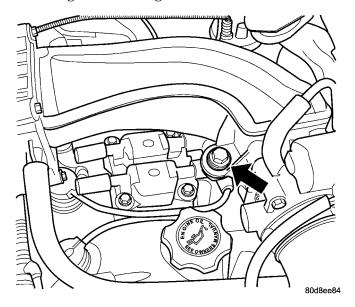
FRONT STRUT BOLTS UPPER INTAKE
